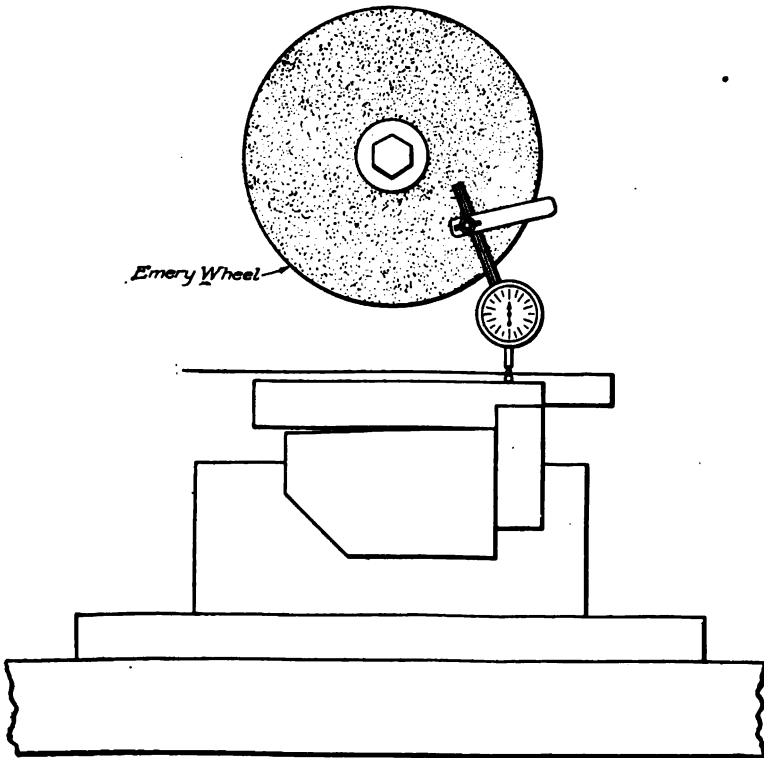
Emery Wheel and Indicator Mounted for Grinding
